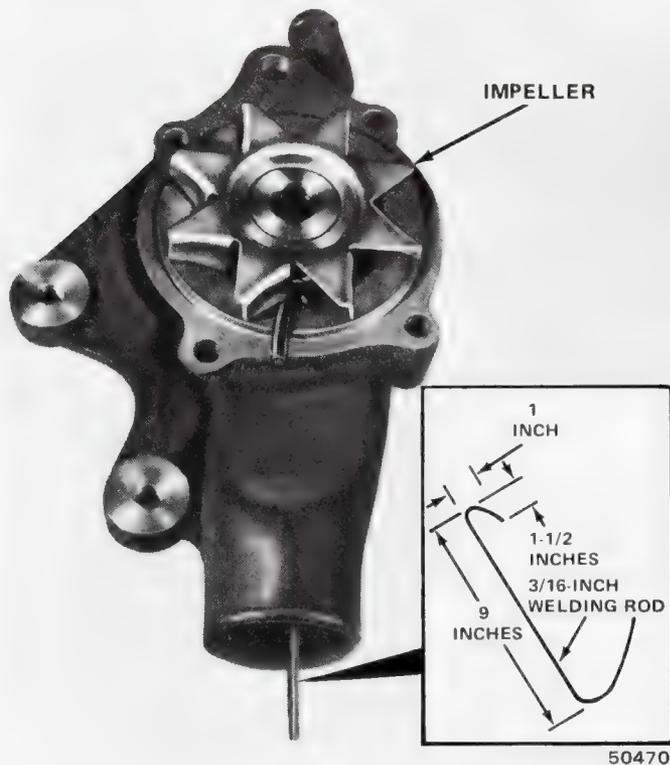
C-11 Checking Water Pump for Loose Impeller—Typical
